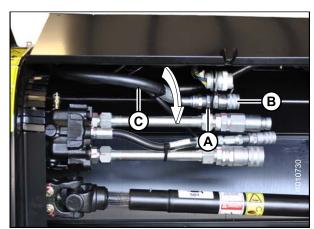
Auger and Reel Pressure Coupler and Hose – 18-Ft. Header Shown
